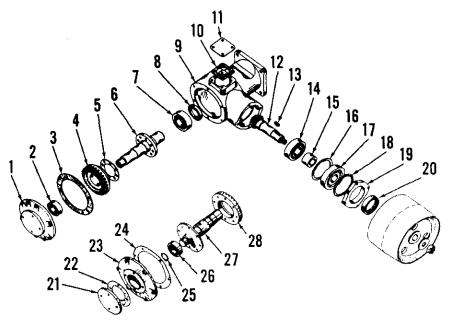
Exploded view of the belt pulley unit. Drive is taken from pto shaft. Items 4 through 6 are used for clockwise rotation and items 27 and 28 are used for counterclockwise rotation. Items 21 through 25 are used on early models.
